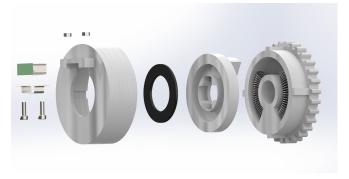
The proposed design of the elastic gears for *Serpens*: the housing (left) with the encoder connected, the base (middle) with the magnetic rotary ring attached, and the cogwheel (right). The shaft (not depicted in this figure) runs through all parts. Compression springs are placed in the chamber of the cogwheel on each side of the outset of the base, providing passive-compliance.
